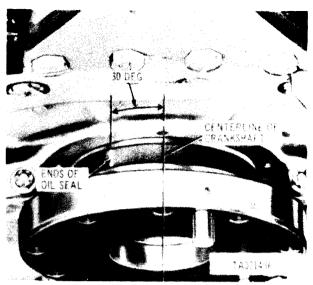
Correct position for crankshaft oil seal split line before installing seal retainer.
